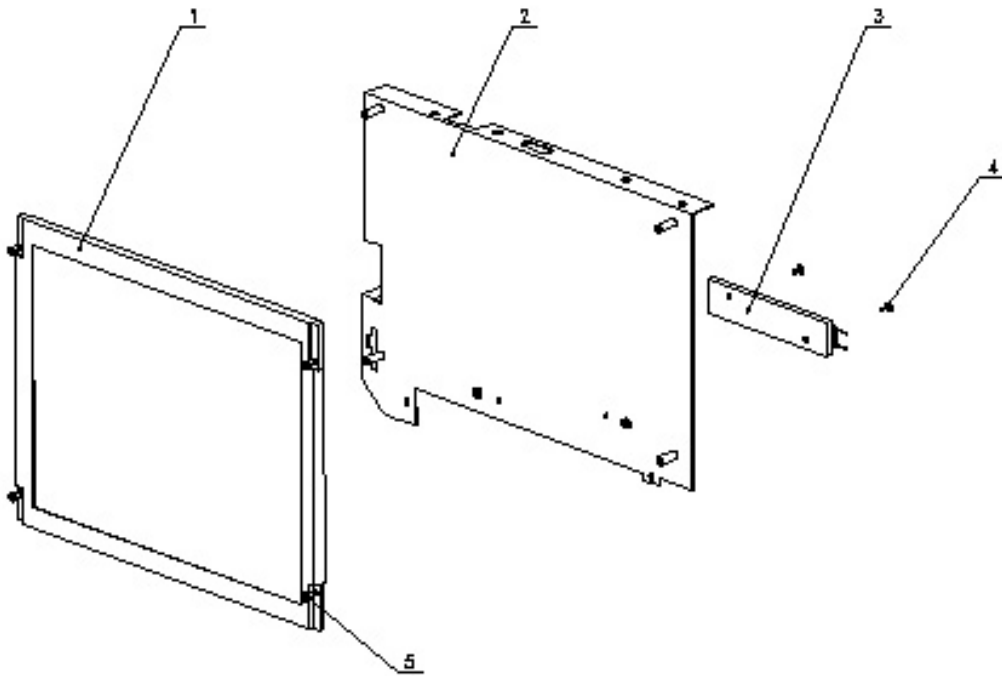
M9 Series Monitor Main Bracket Disassembly, Exploded
